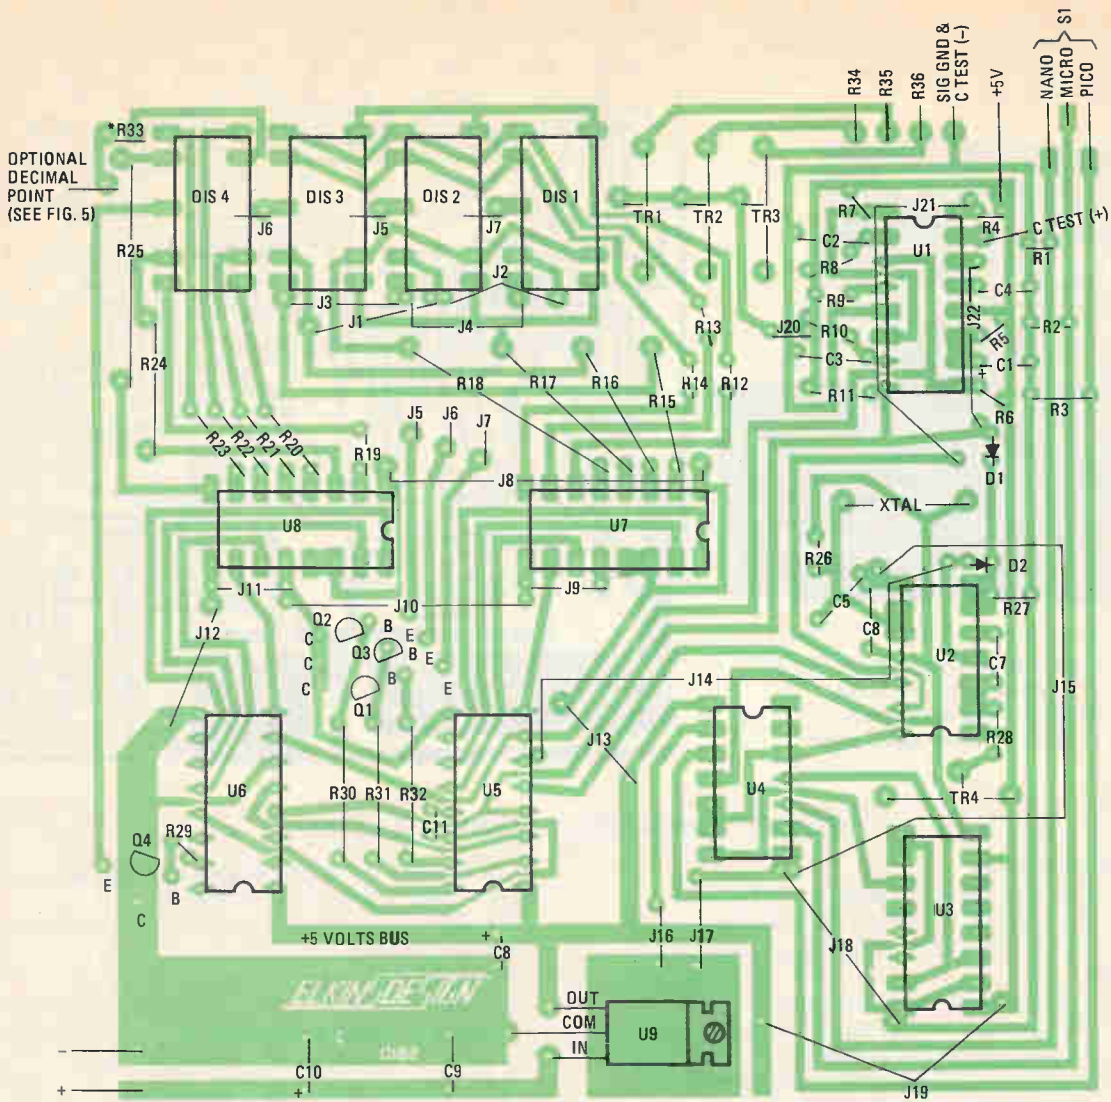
PARTS LOCATION DIAGRAM is illustrated here from the foil side up to assist readers should they wish to trace the circuit when troubleshooting. A photo is provided showing the parts location from the top side of the board. Do not install wires that leave the board until after switch S1 is installed and electrical connection to the rear and front panels are to be made.
